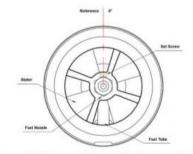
S-29 Stator Axial Position (looking into draft tube)
